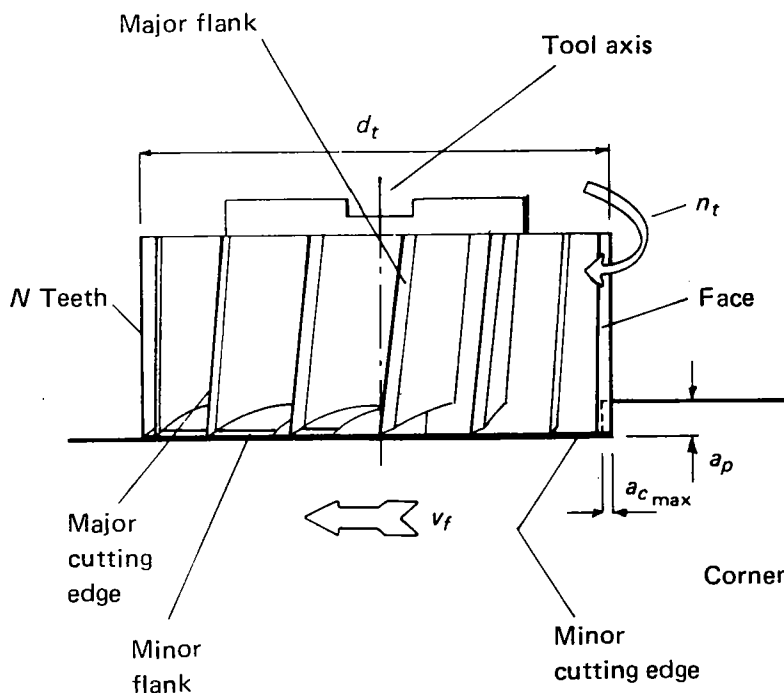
Geometry of face milling, where $a_{c_{\max}} = v_f / Nn_t$.
